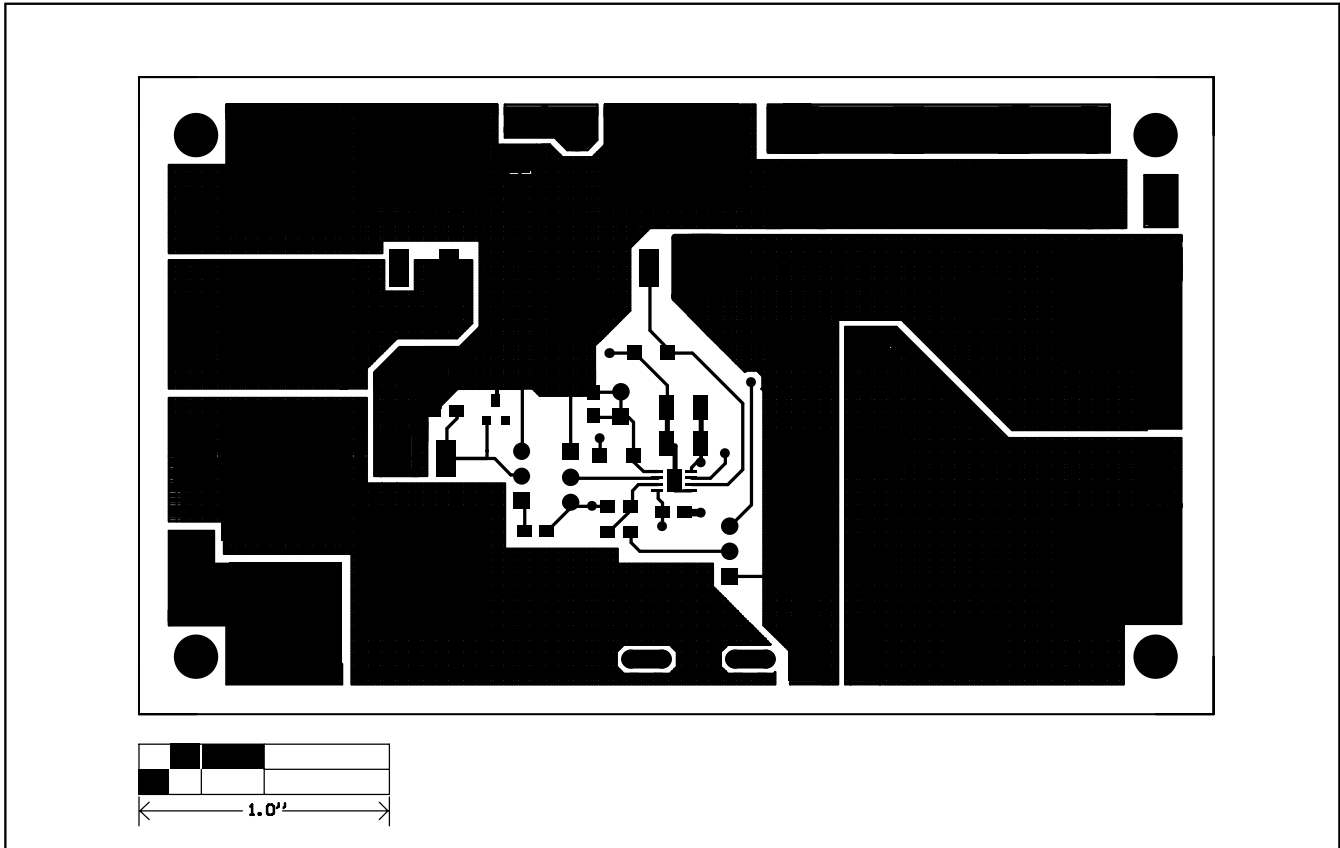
MAX6397 EV Kit PC Board Layout—Component Side
